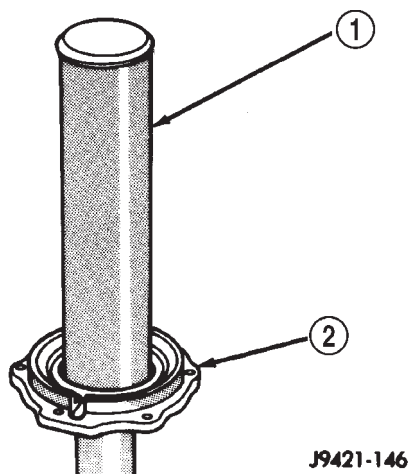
Installing Oil Seal In Front Bearing Retainer (Typical)
